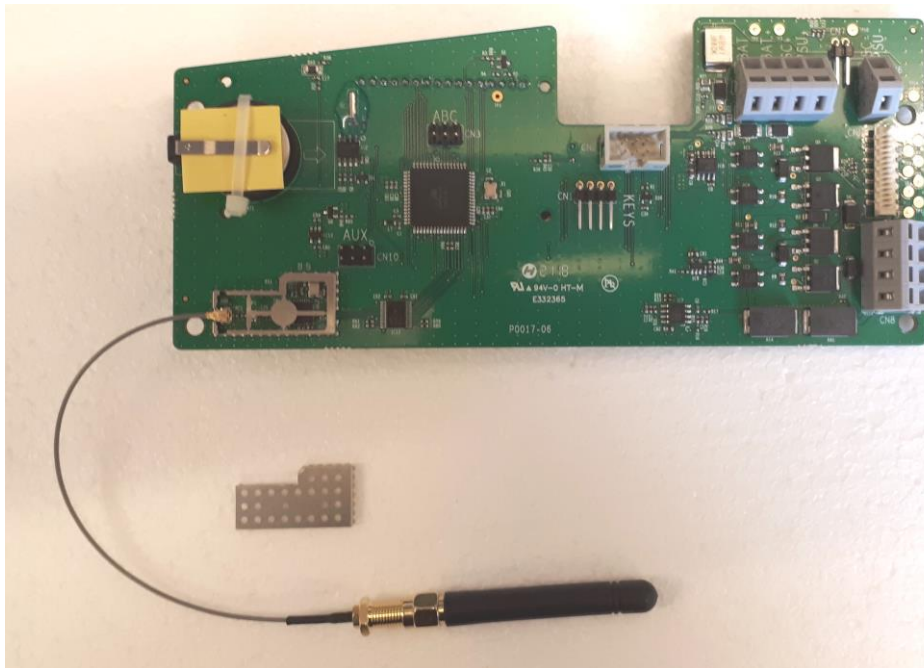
Shows the front side of the control PCBA, without EMI shield top.
